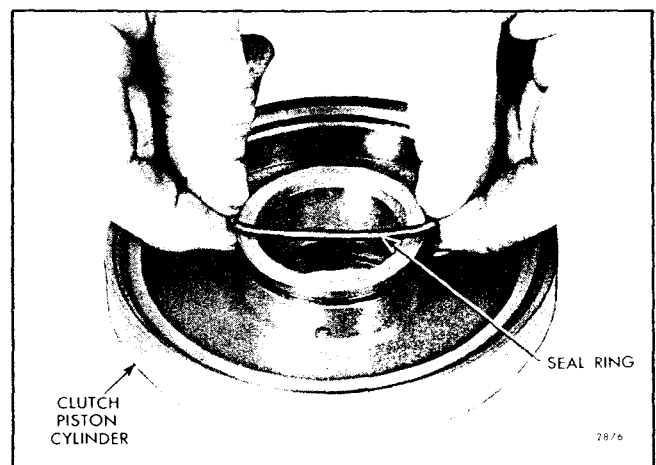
Installing Forward Clutch Piston Seal Ring in Clutch Piston Cylinder
